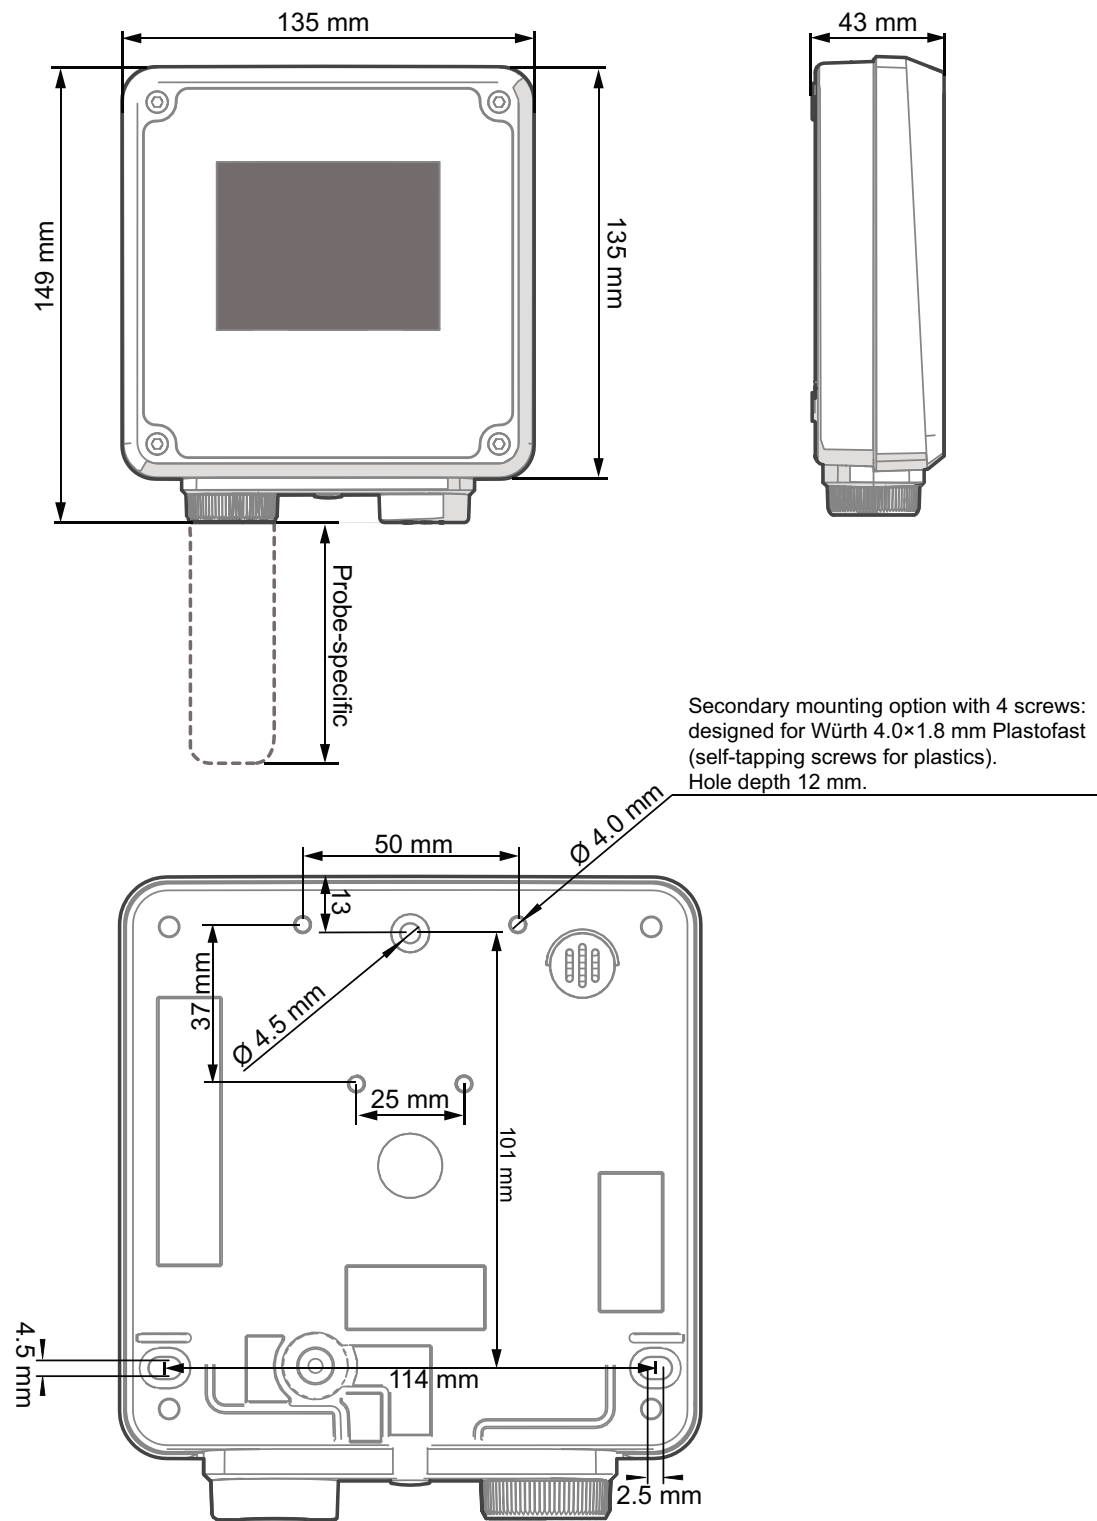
Indigo Transmitter Dimensions in Millimeters (mm)
